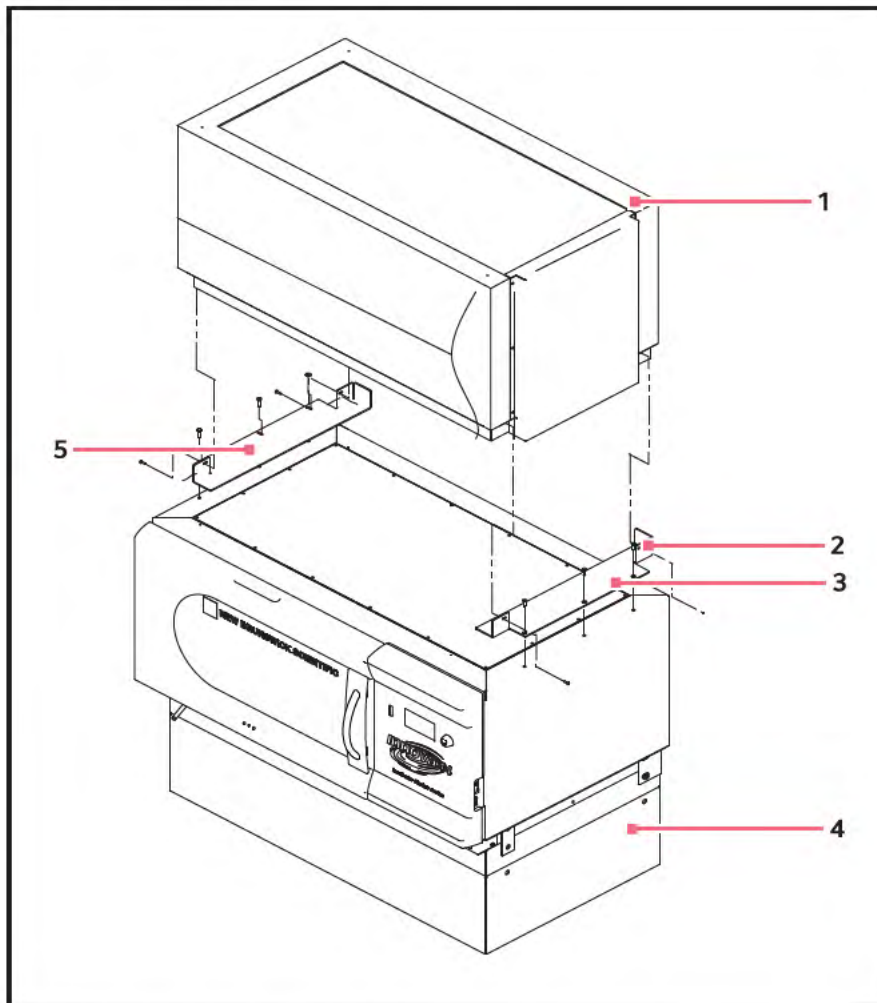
Install 4400/4430 to 44/44R Stacking Kit
